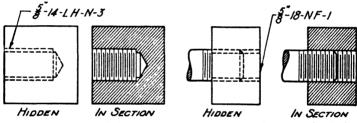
Threaded holes. Fig. 11. Rod in threaded hole.
